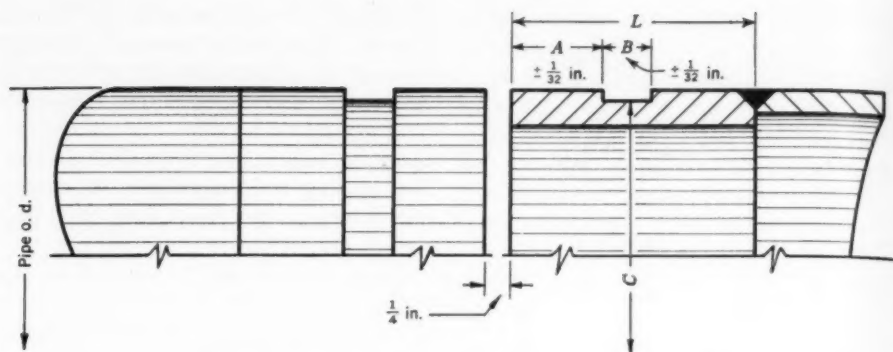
Victaulic Adaptor Butt-welded to Pipe End
